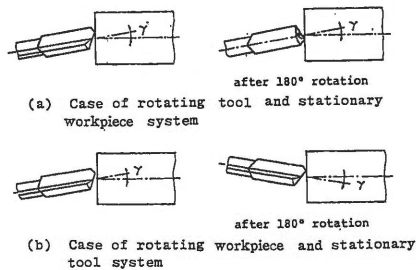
Condition for hole deviation from the setting axis (Workpiece reference system)
